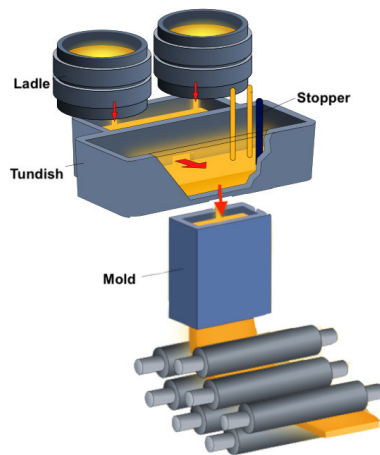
Diagram of tundish and mould details as part of a steel products manufacturing process [179]
